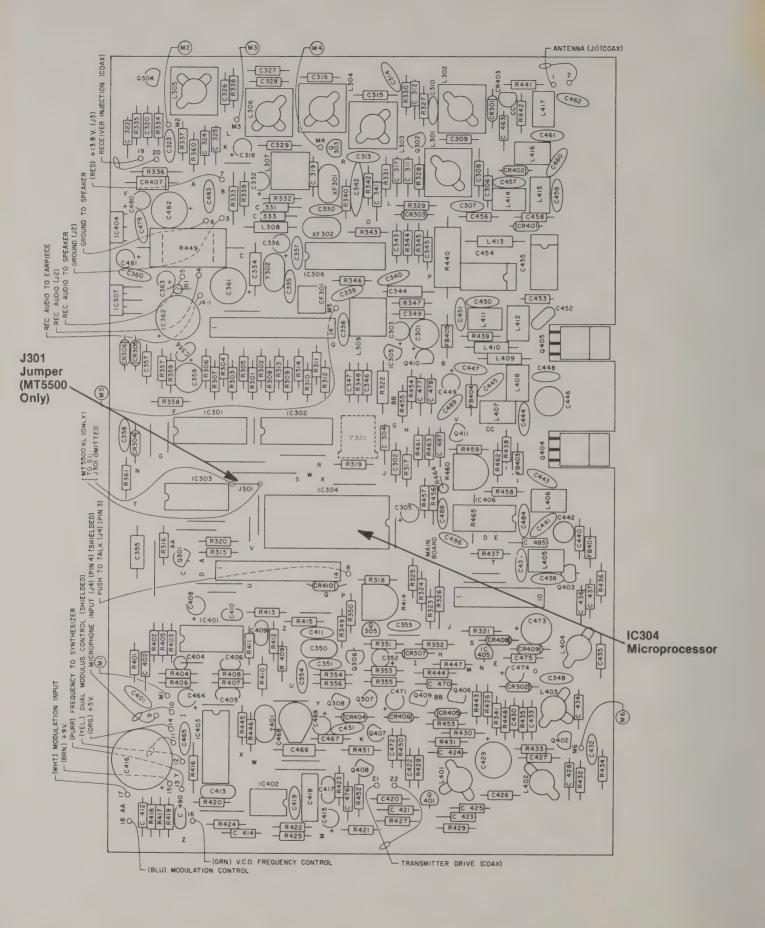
A. Parts Placement, Main PCB Assembly: Top View.
